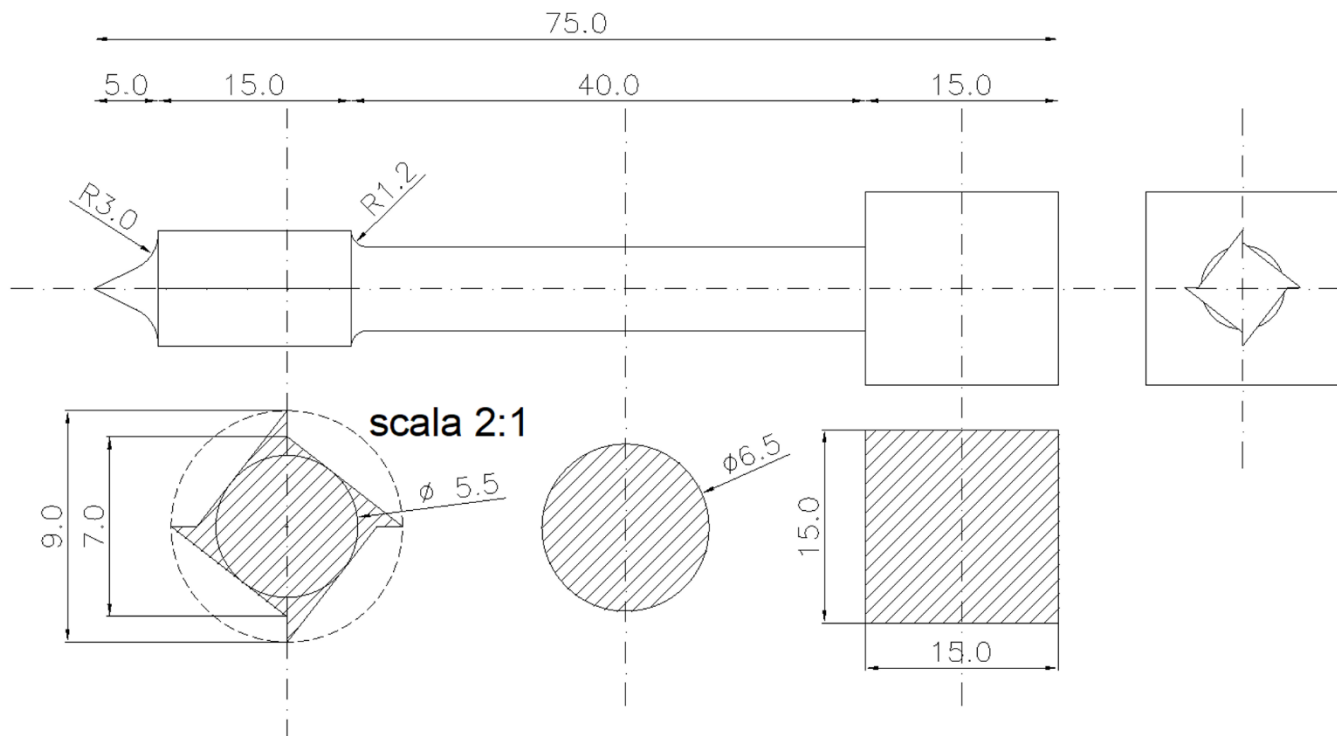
Technical drawings with specifications and dimensions of the TPT used in this research.
